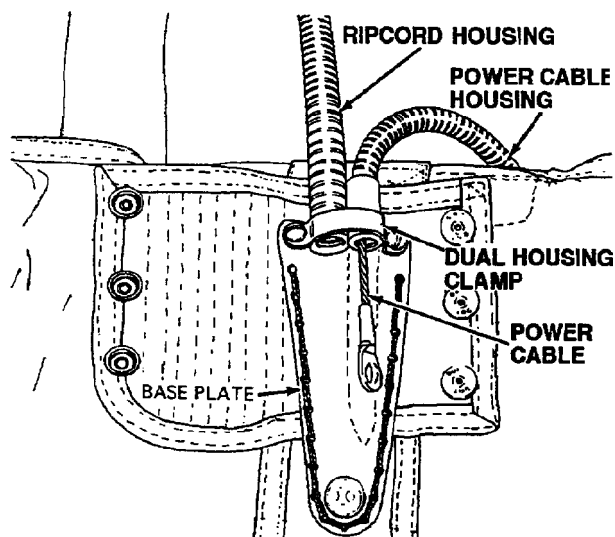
Attachment of Ripcord Release Power Cable and Manual Ripcord Housing to Base Plate
